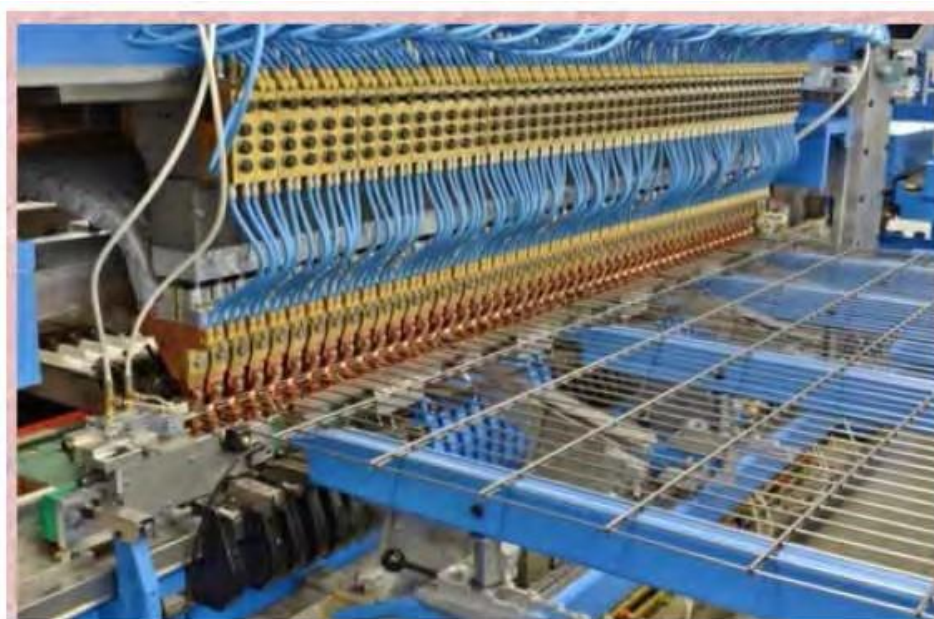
Automatic Spot Welding Machine for WWF
